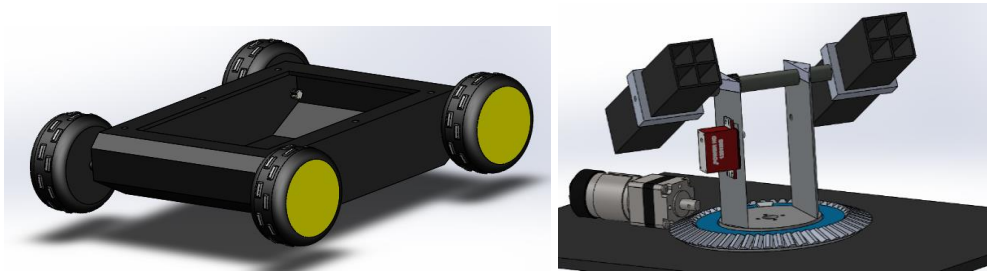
Mobile base robot platform (left) and the remote-controlled mobile weapon platform (right)
